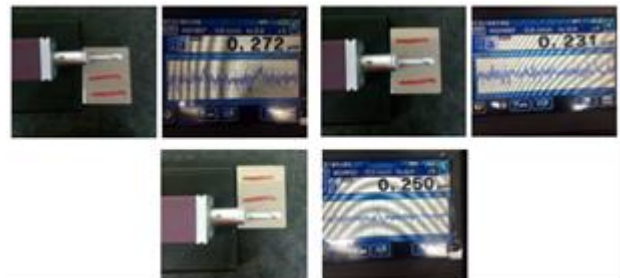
Measuring Result with Grinding Wheel PA.46.8.V
